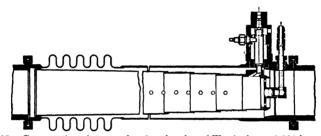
Cross section of one combustion chamber of Westinghouse 2,000-hp gas-turbine plant. Inlet at the right; fuel nozzle, flame tube concentric in shell, discharge to turbine at the left.
